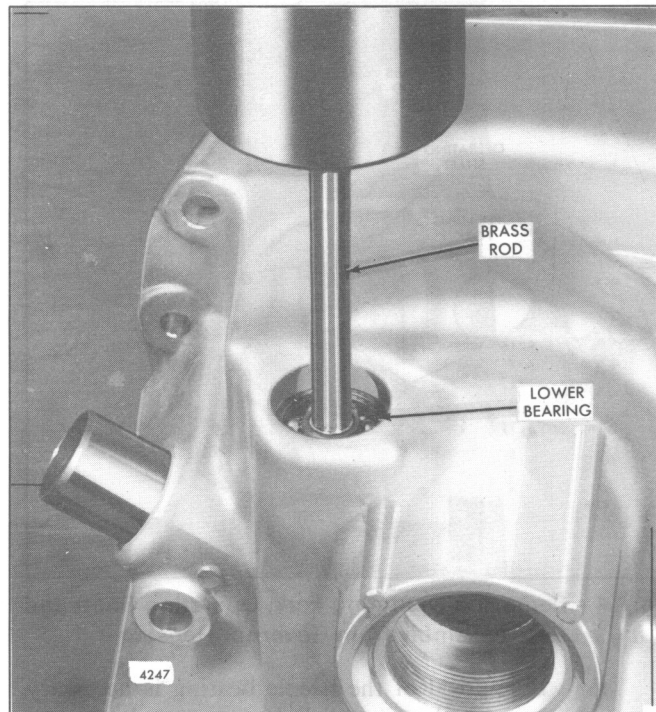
Removing Operating Shaft from Operating Shaft Lower Bearing
